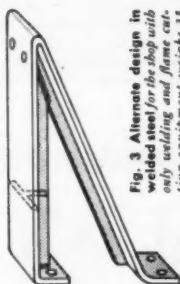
Alternate design in welded steel for the shop with only welding and flame cutting equipment weighs 35 pounds... cuts only \$4.70... a saving of 46% over Figure 1.
